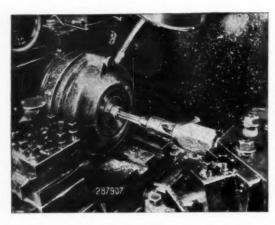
One step in the tapping sequence; the shank of each tap is notched to aid the operator in selecting the correct tool in the series.
